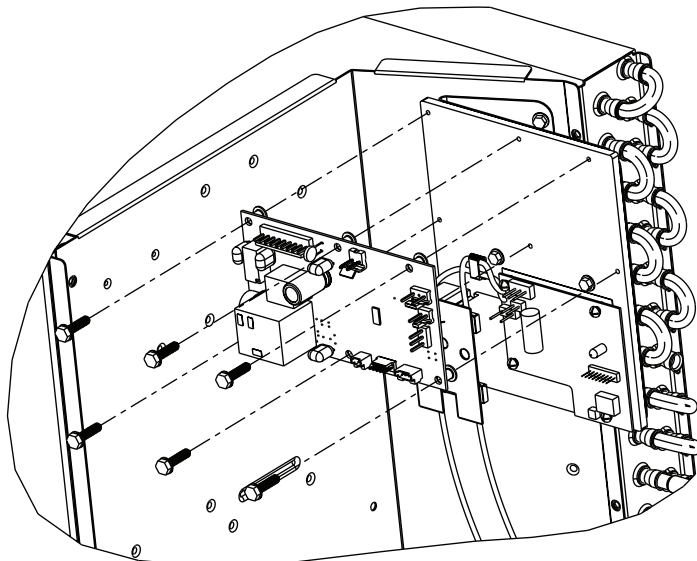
B - MOUNTING CONTROL BOARD SIDE DISCHARGE (HP)
